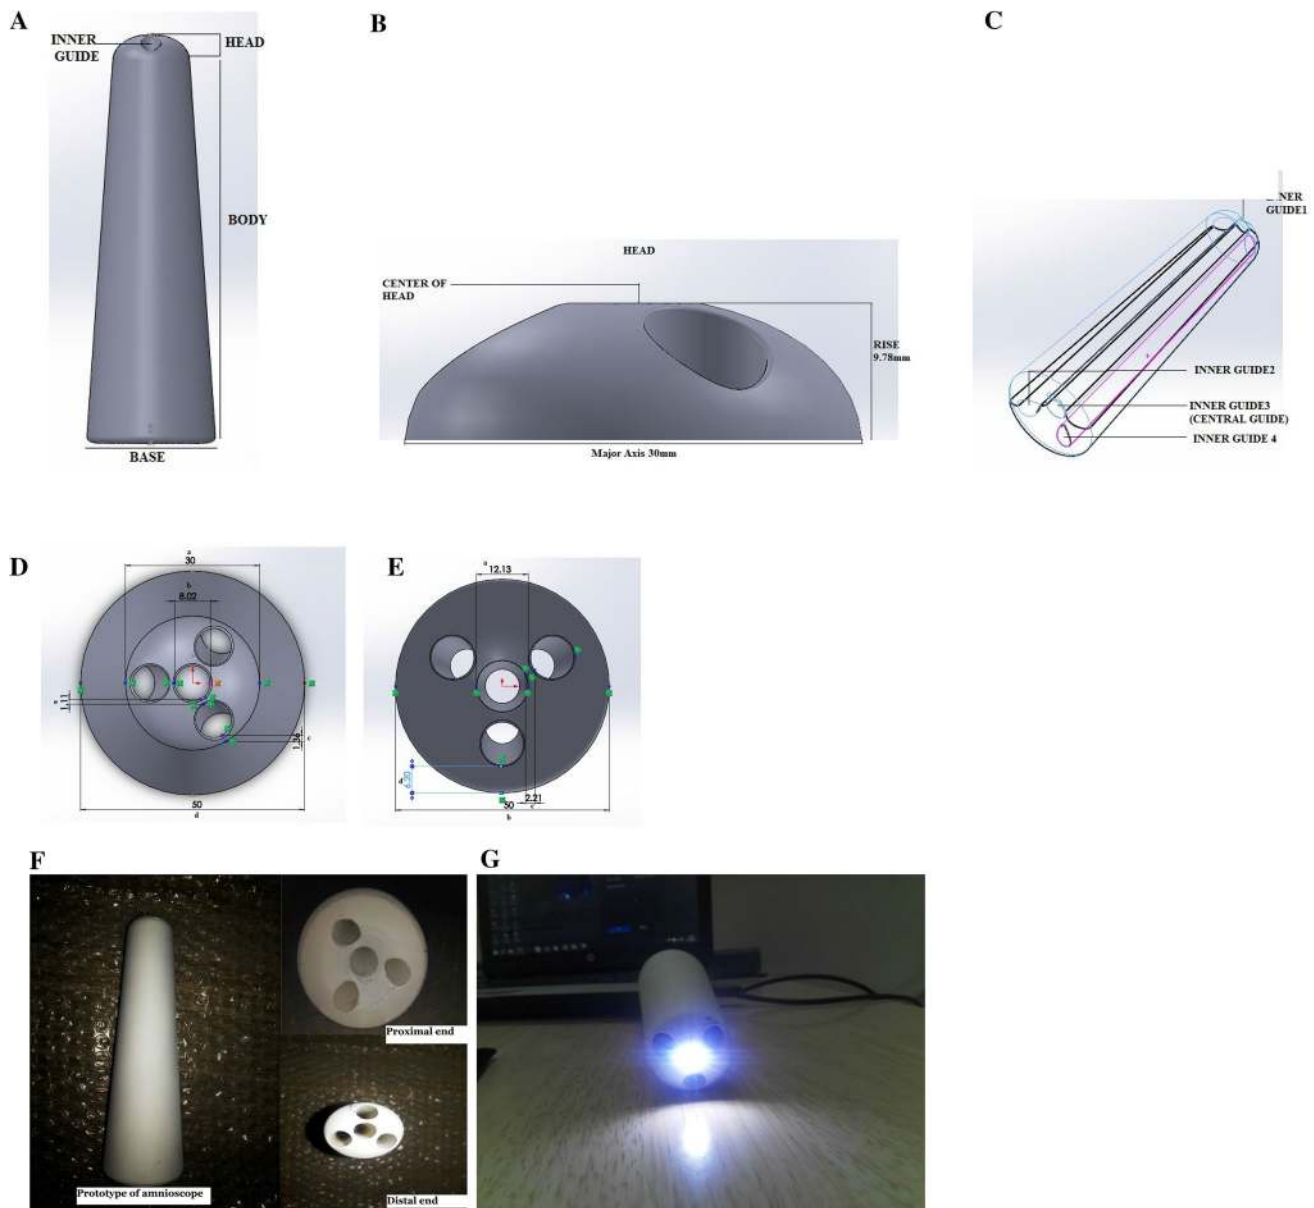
a Scope. b Head. c Inner guides. d Front view of the scope. e Back view of the scope. f A prototype of NB scope was fabricated using fused deposition modelling (FDM) 3D printing technology. g Camera in the central guide of the NB scope
